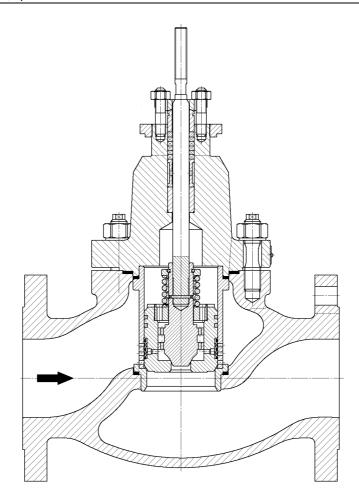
Z1B type control valve with a balanced valve plug with a pilot
